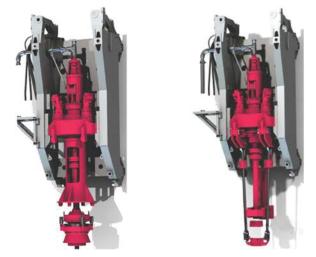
Hydraulic top drive with clamping head (left) and elevator links (right)
